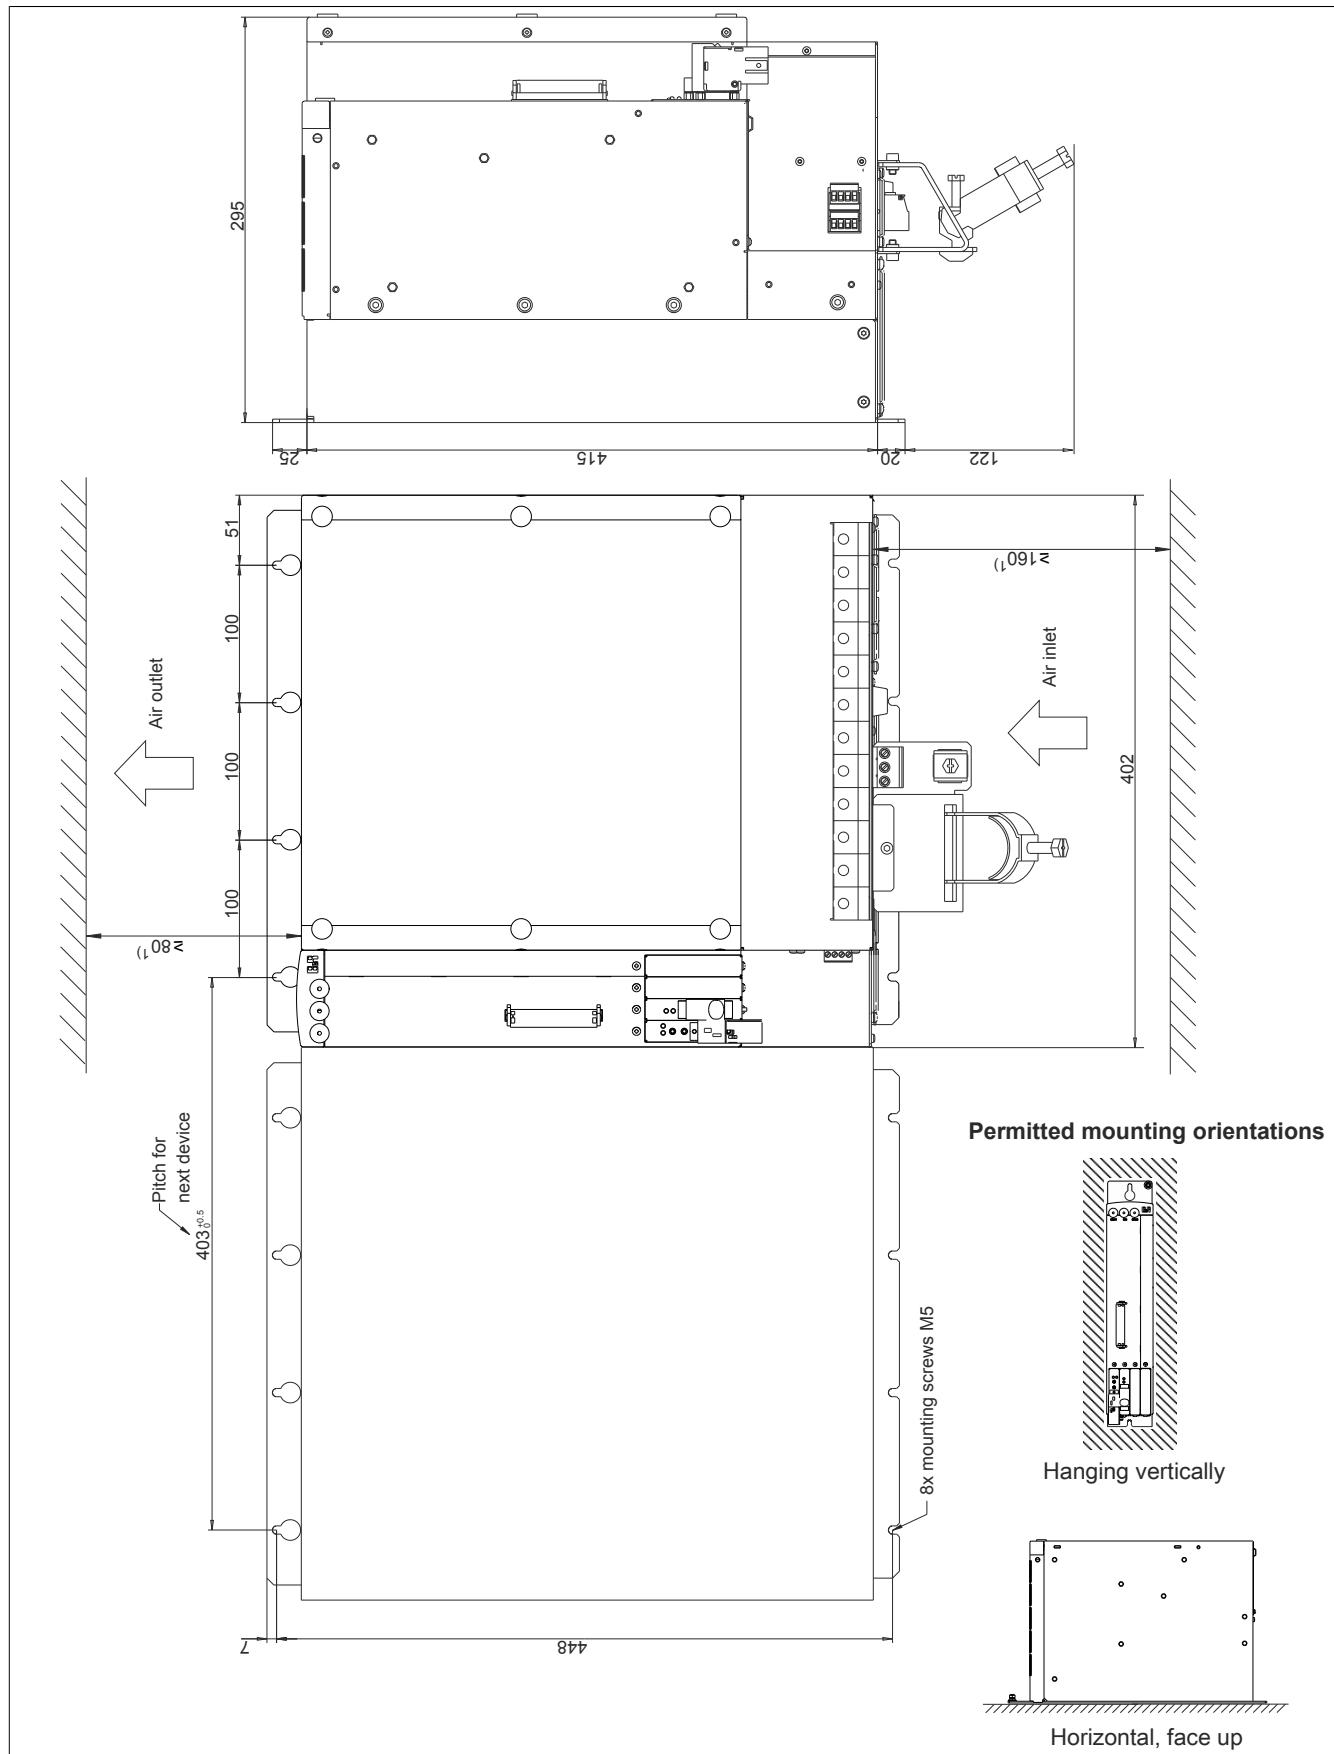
ACOPOS 128M - Dimension diagram and installation dimensions
